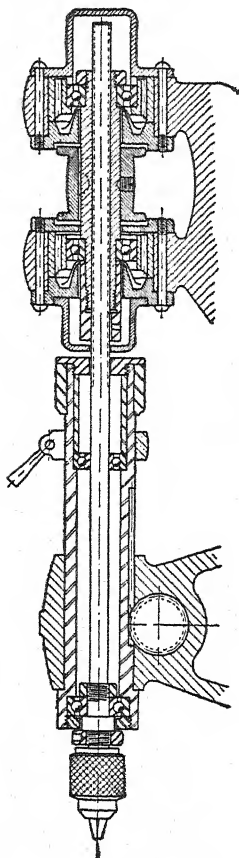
A Sectional View of the Avey No. 1/2 Drilling Machine Spindle Designed for High Speed on Light Work.
